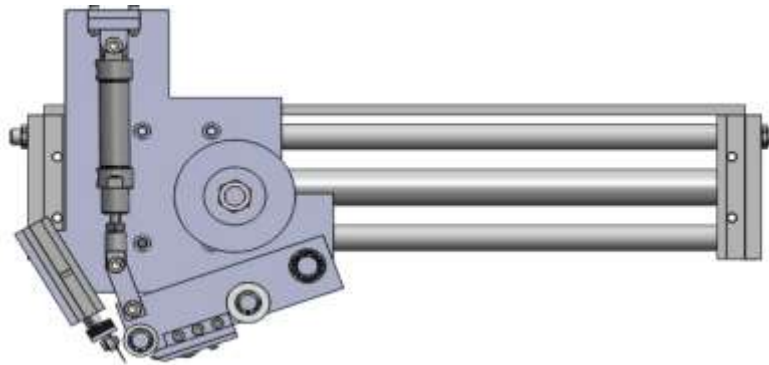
Tape sticking mechanism mounted on B2 sliding cylinder
